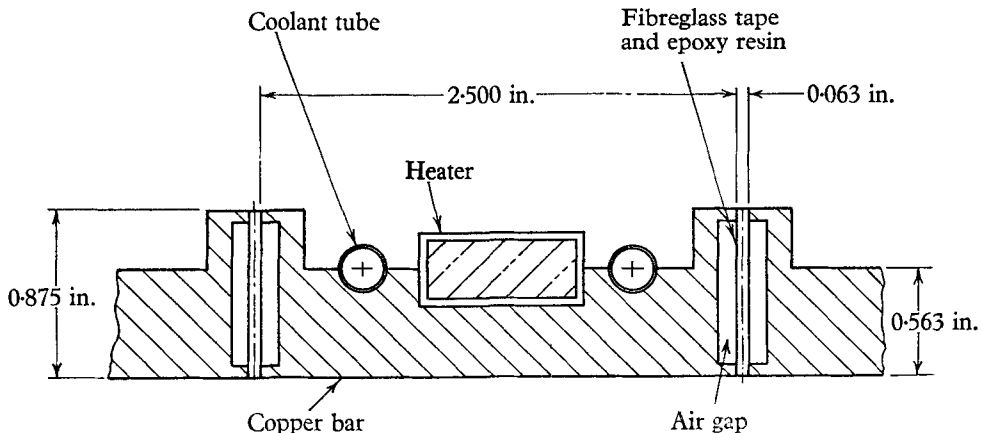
Heat transfer model detail; cross-section of typical segment.
